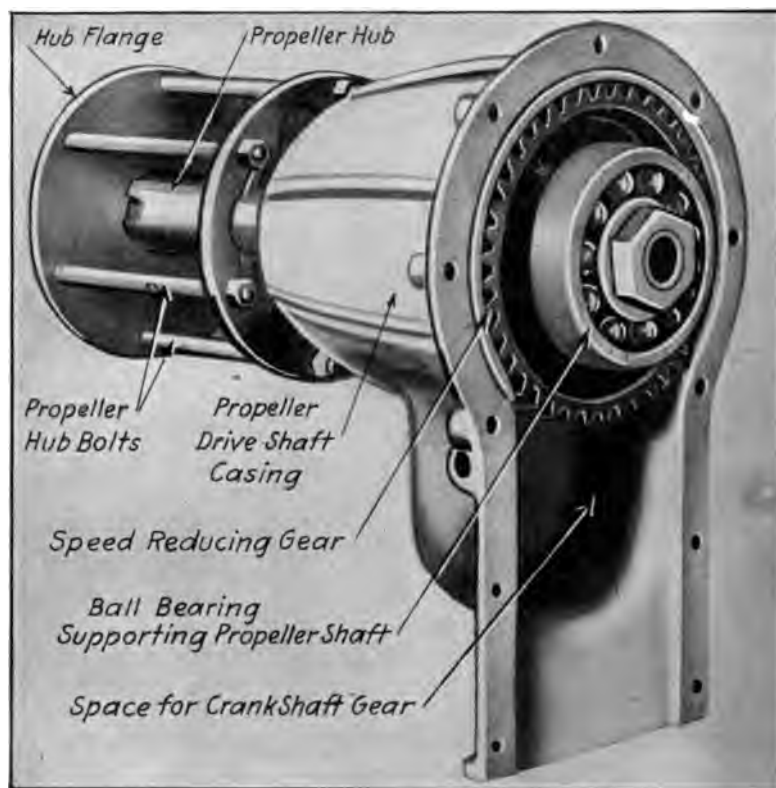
Showing Arrangement of Geared Down Propeller Drive.
